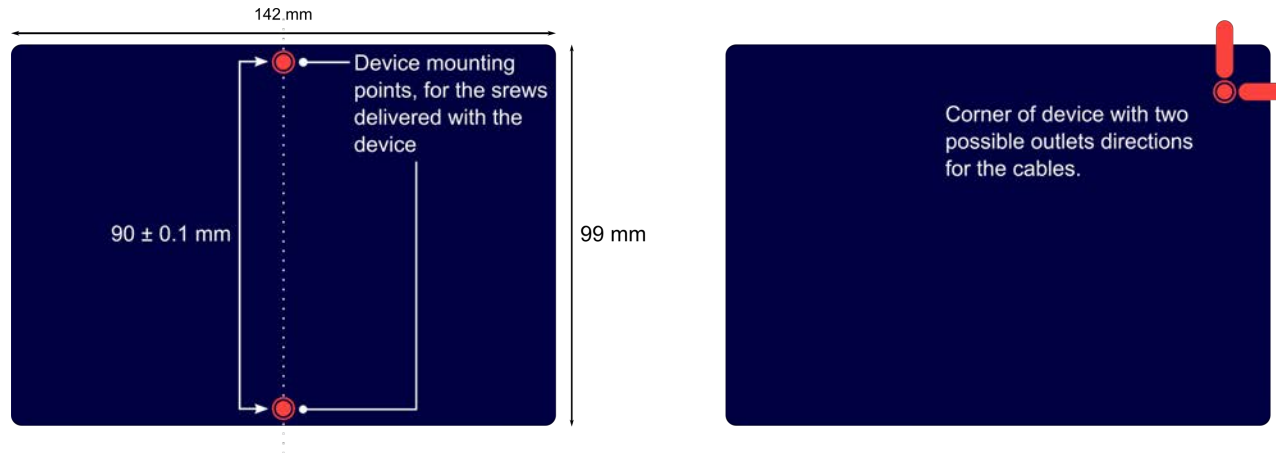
Schematic device top view showing the mounting points and cable outlet options
